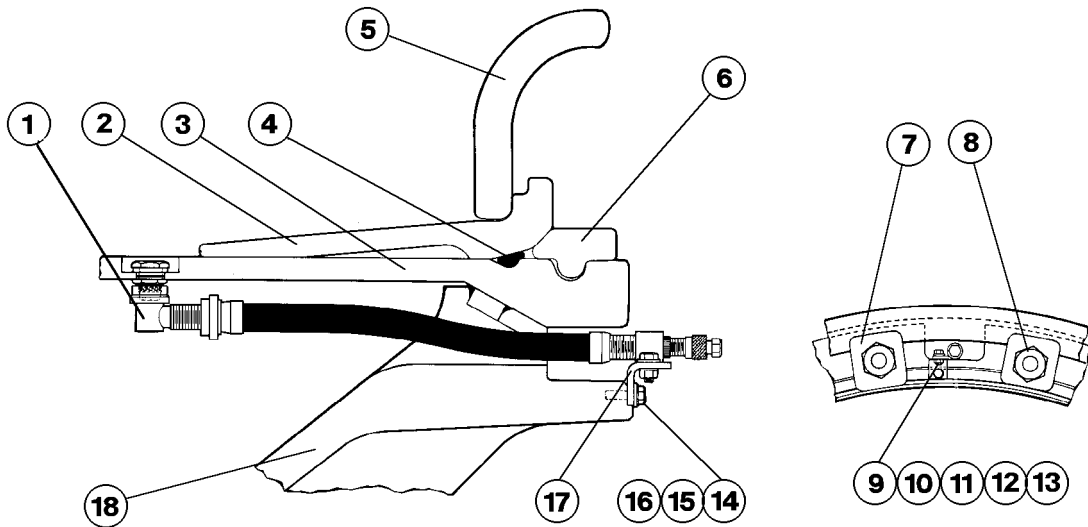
FRONT WHEEL ASSEMBLY
